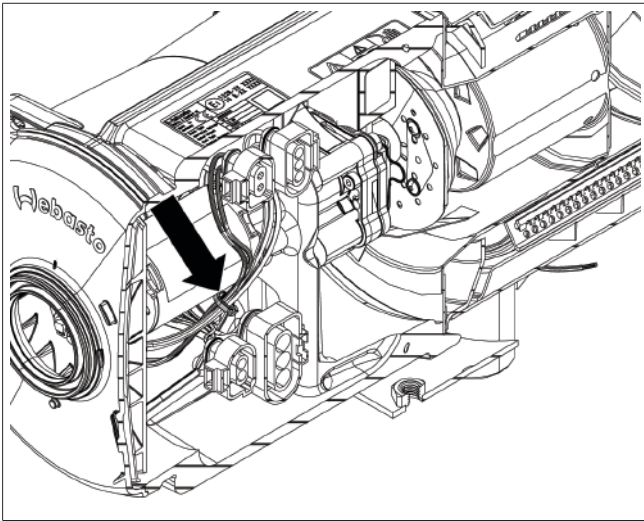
Position of cable tie (on electrical wiring for ignition spark generator and nozzle block preheater)
